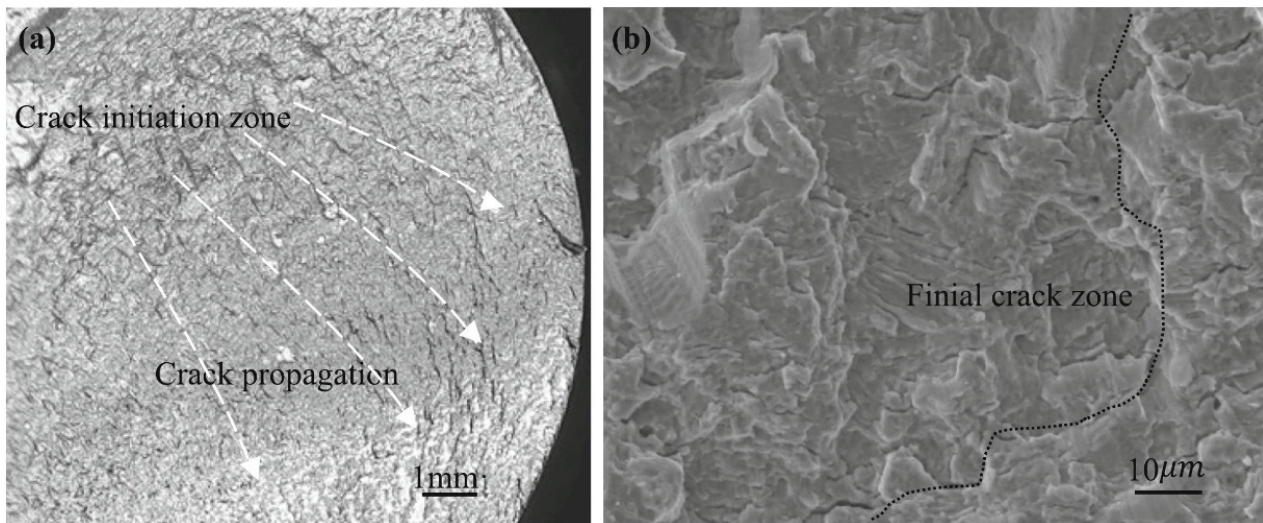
Fatigue crack zones for cold extrusion/expansion specimens: (a) overall view and (b) zoomed view of the crack (at a typical location). Reprinted with permission from Ref. [79]. Copyright 2024 Elsevier.
